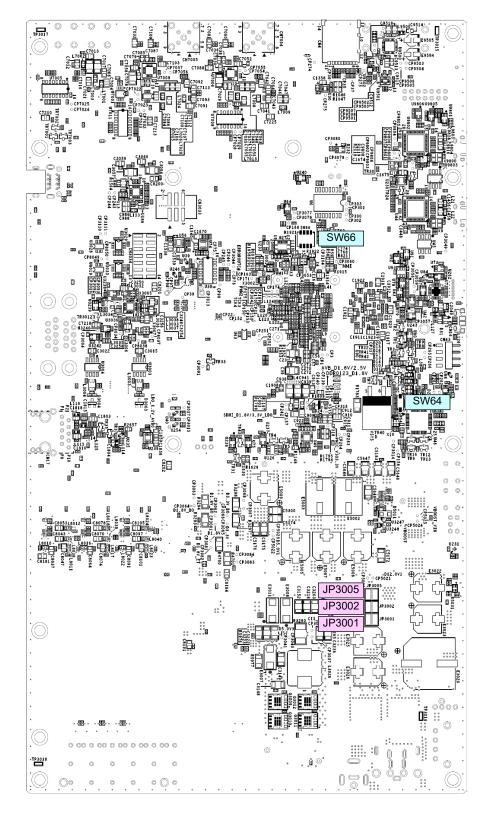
Location of Switches on the Gray Hawk Single Board (Solder Side)
